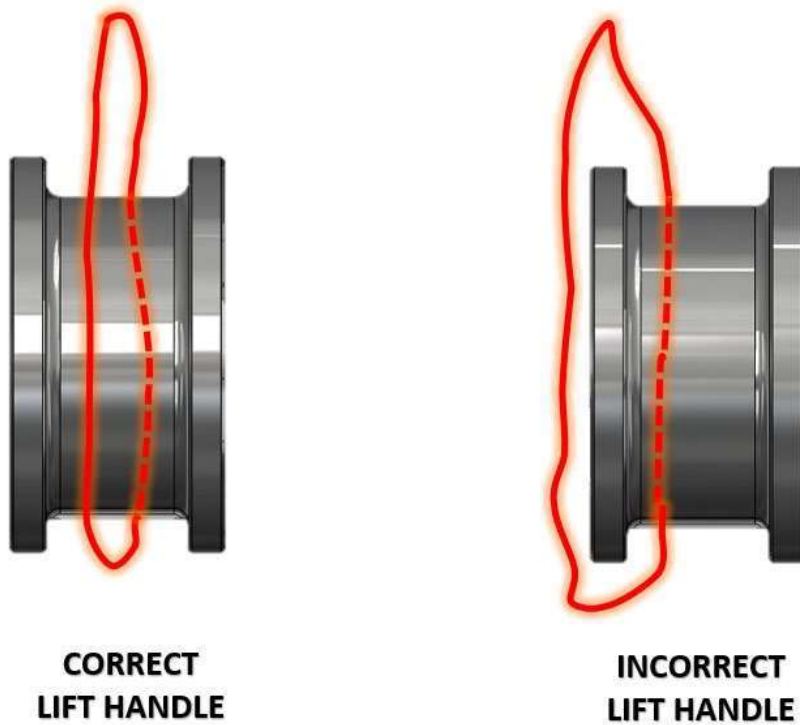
C&C DPWC Series dual plate wafer check valve lift handle w/o lifting lug
